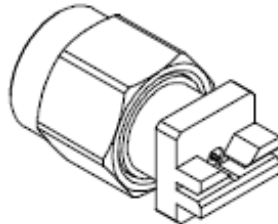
Customized SMA Connector for Flex Assembly Testing
